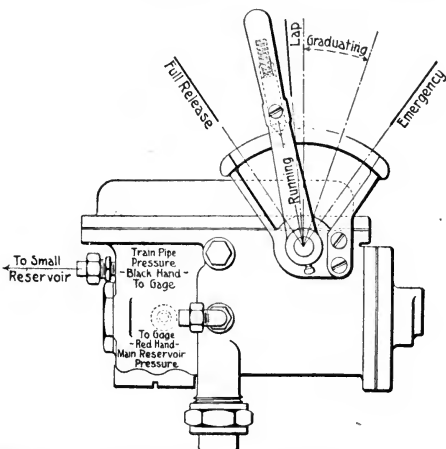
Side View of New York Engineer's Brake-Valve, Showing Different Positions of Handle.
